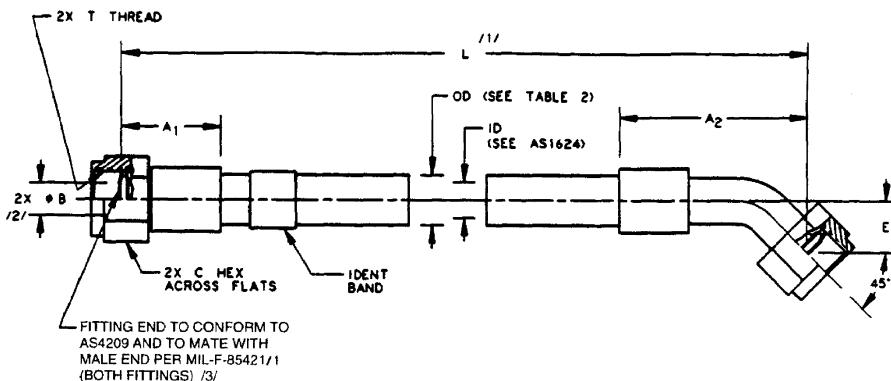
HOSE AND FITTING DIMENSIONS
